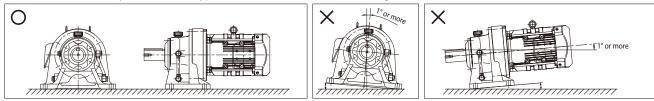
Mounting Angle (Example: Foot Mount Type)
